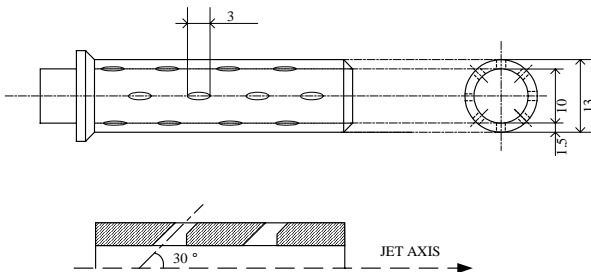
Perforated Tube with Edge-Cut-Oblique-Perforation (OE-type)
